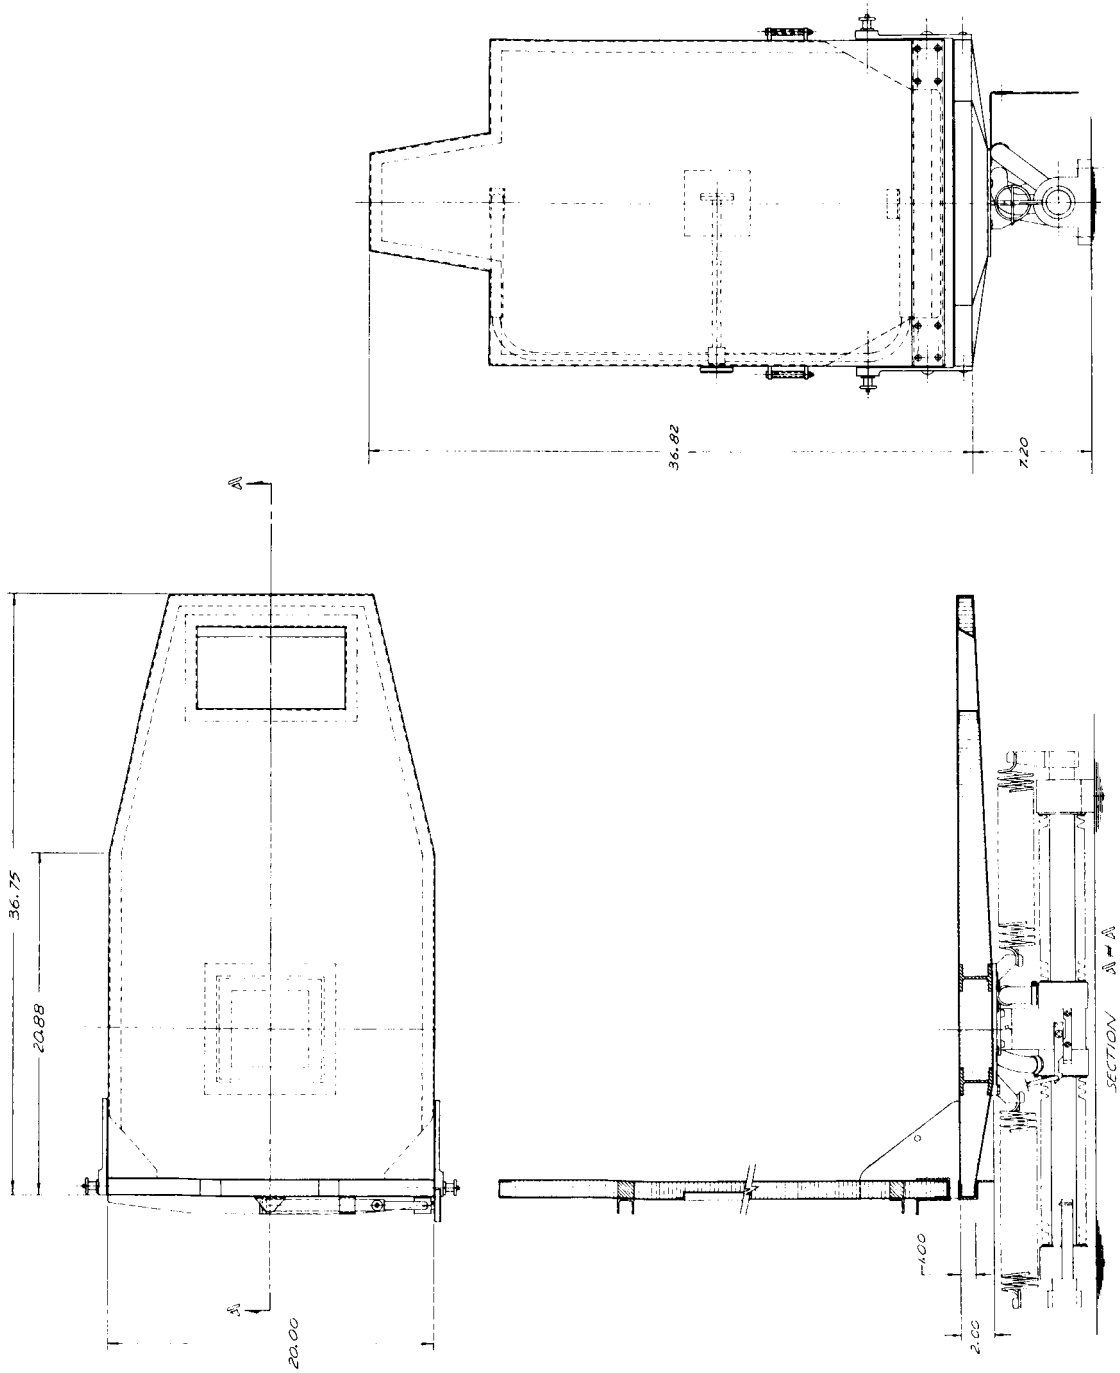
Preliminary Design of the KC-135 Prototype MMS
